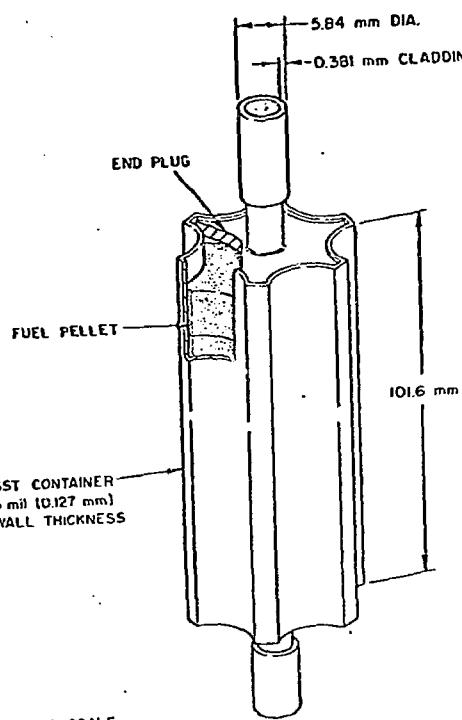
Three-Dimensional View of Six-Channel Blockage Pin.
